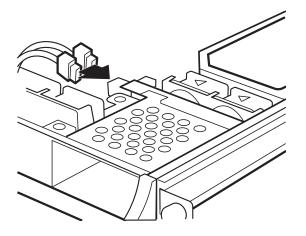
Connecting Cables to the SAS IF Assembly
